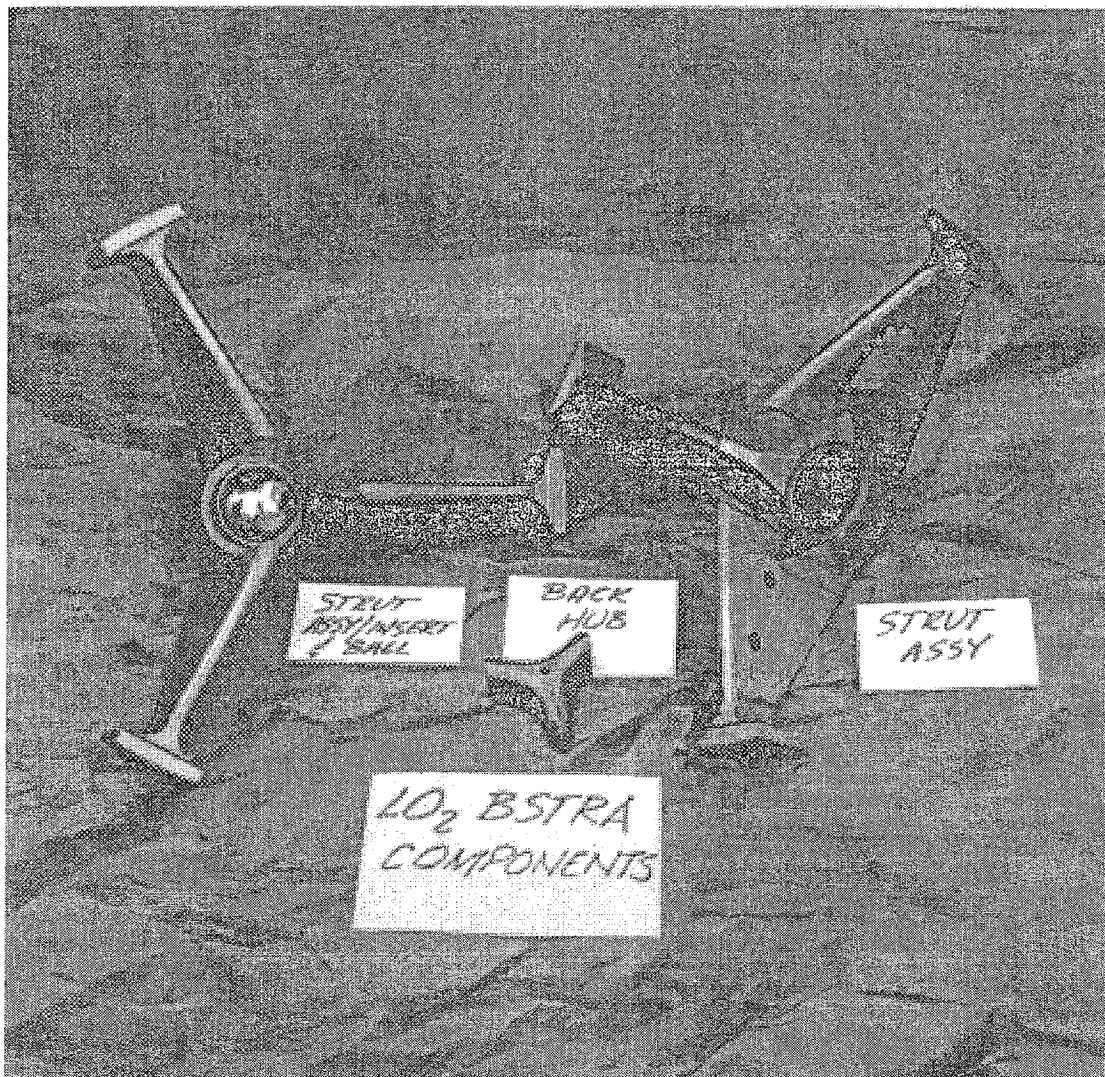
Ball-Strut-Tie-Rod-Assembly (BSTRA) Components
